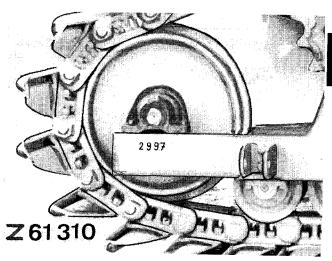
Serial Number of Track Assembly, L.H. Side
